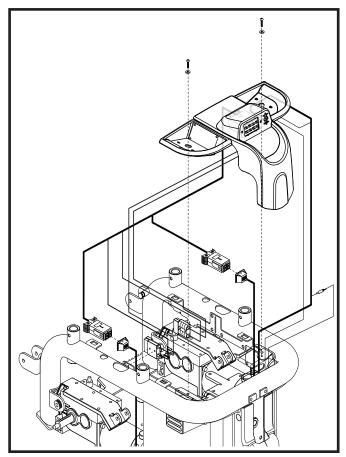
Jazzy 1121 Electronics Tray Assembly/ Disassembly
